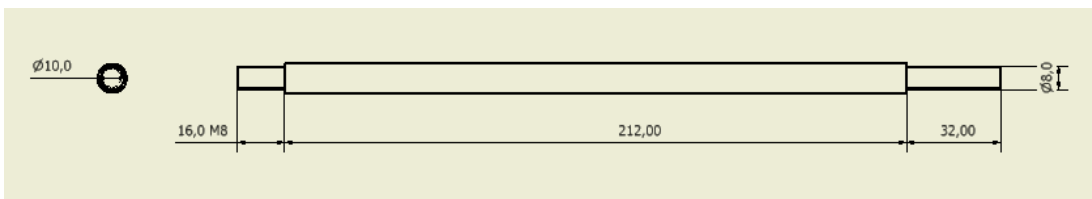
Drawing of the ion optics mounting rods used to mount the ion optics in the chamber.
